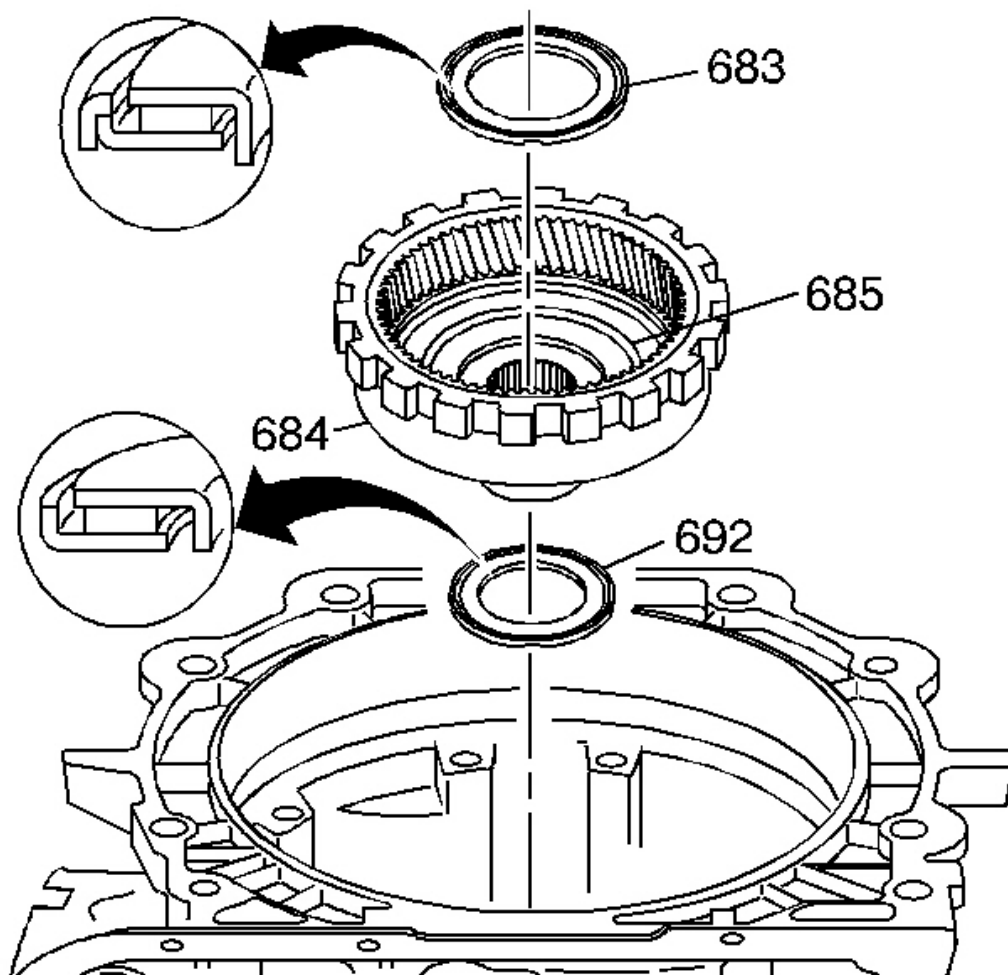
View Of Reaction Carrier/Support Thrust Bearing Assembly
